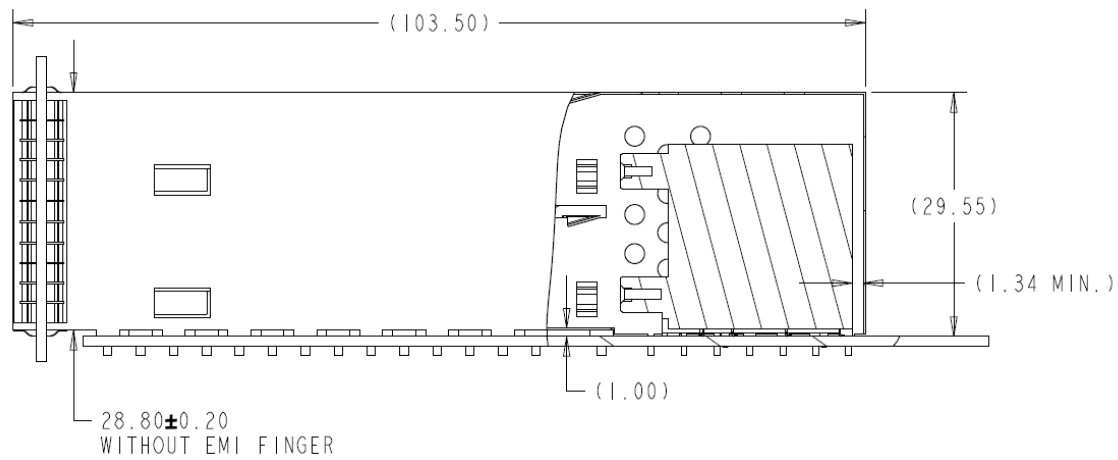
through Figure 7-5 show the cage datum, positioning pin, port size, and cage height of the cage with 14.9mm vertical pitch. Figure 7-6 shows that the middle row compliance pins in the 1x4 cage should be shorter than the others to support belly-to-belly applications.
